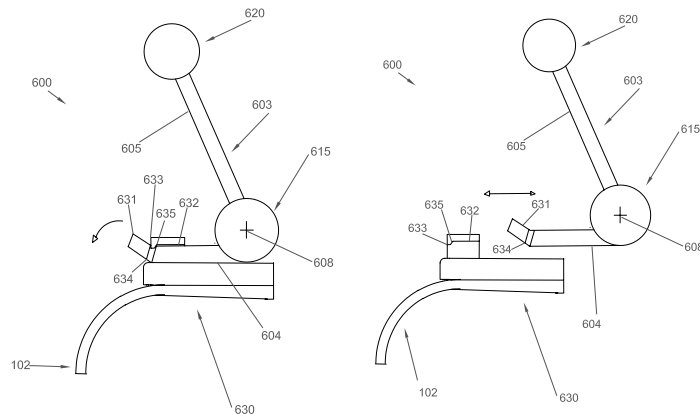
Neck supporting exoskeleton torso frame coupler (a) engaged (b) disengaged.
